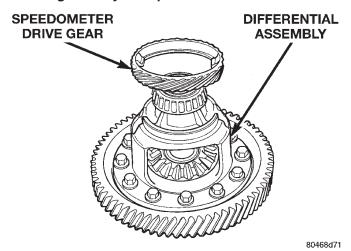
Speedometer Drive Gear Removed INSTALLATION
